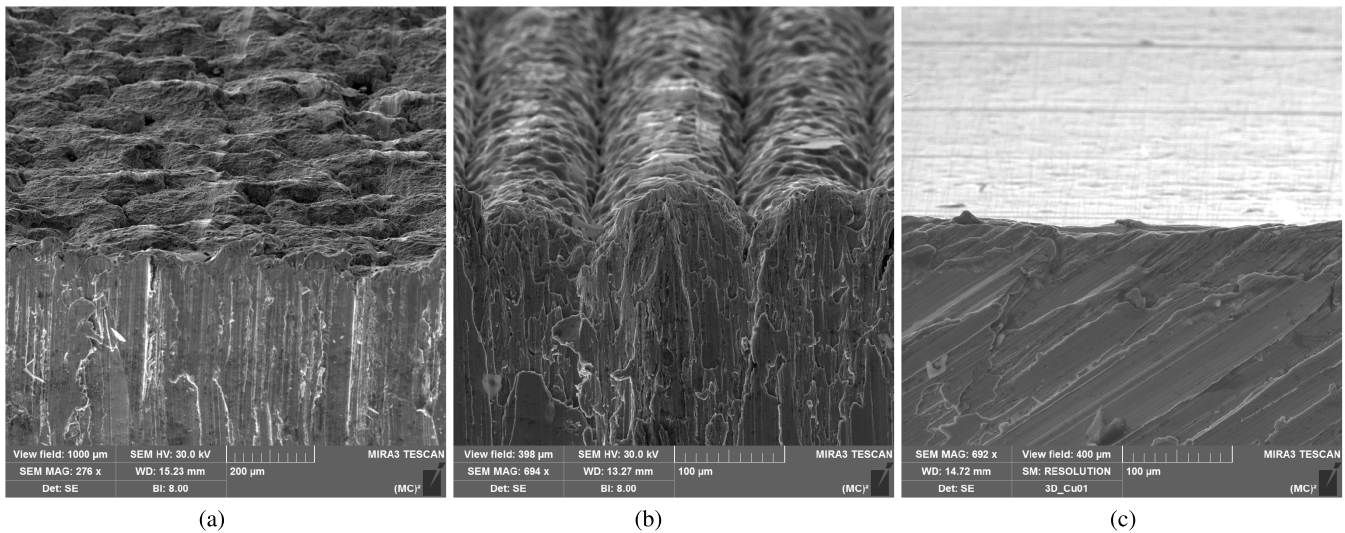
SEM micrographs of the inner surfaces of the (a) SLM-printed, (b) ADAM-printed, and (c) machined outer conductors.
